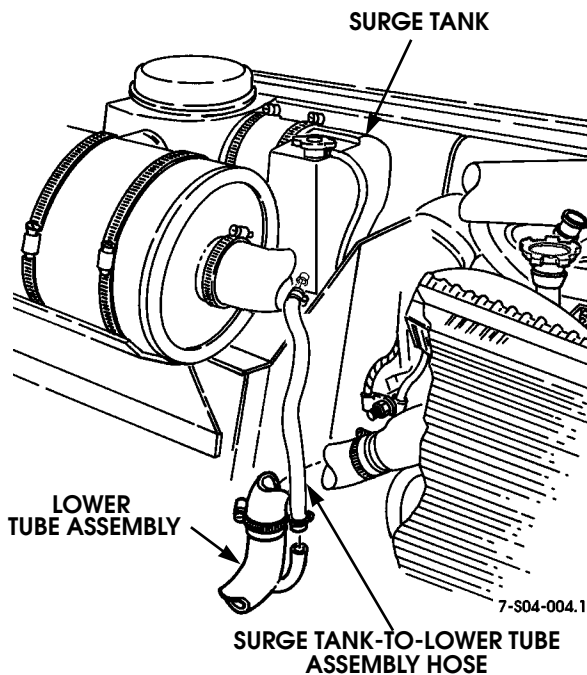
Surge Tank-to-Lower Tube Assembly Hose Location
